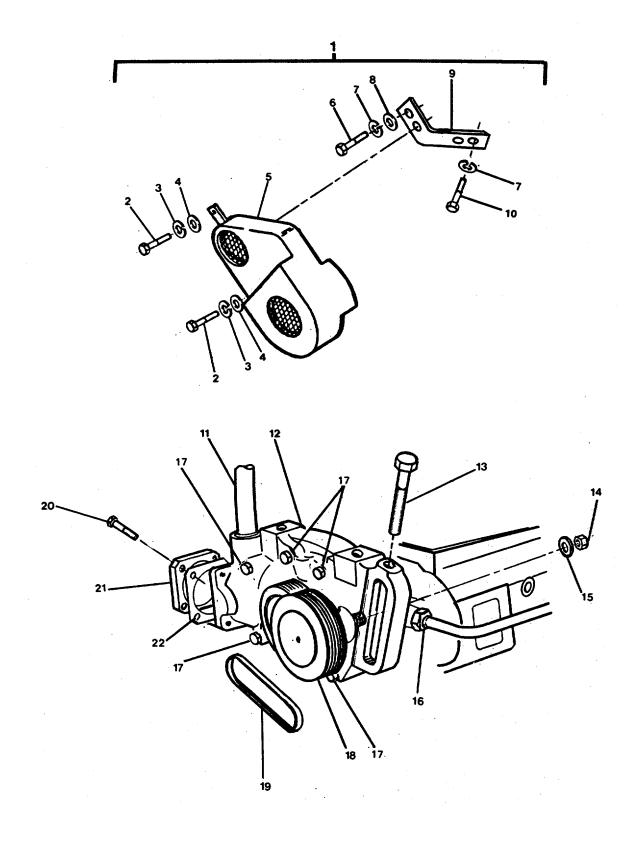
Water Pump and Idler (Sheet 1 of 3).
